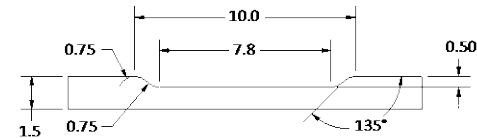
A cross sectional view of the machined pocket used to generate a standoff gap. This feature is machined into the target coupon at the intended weld site.
